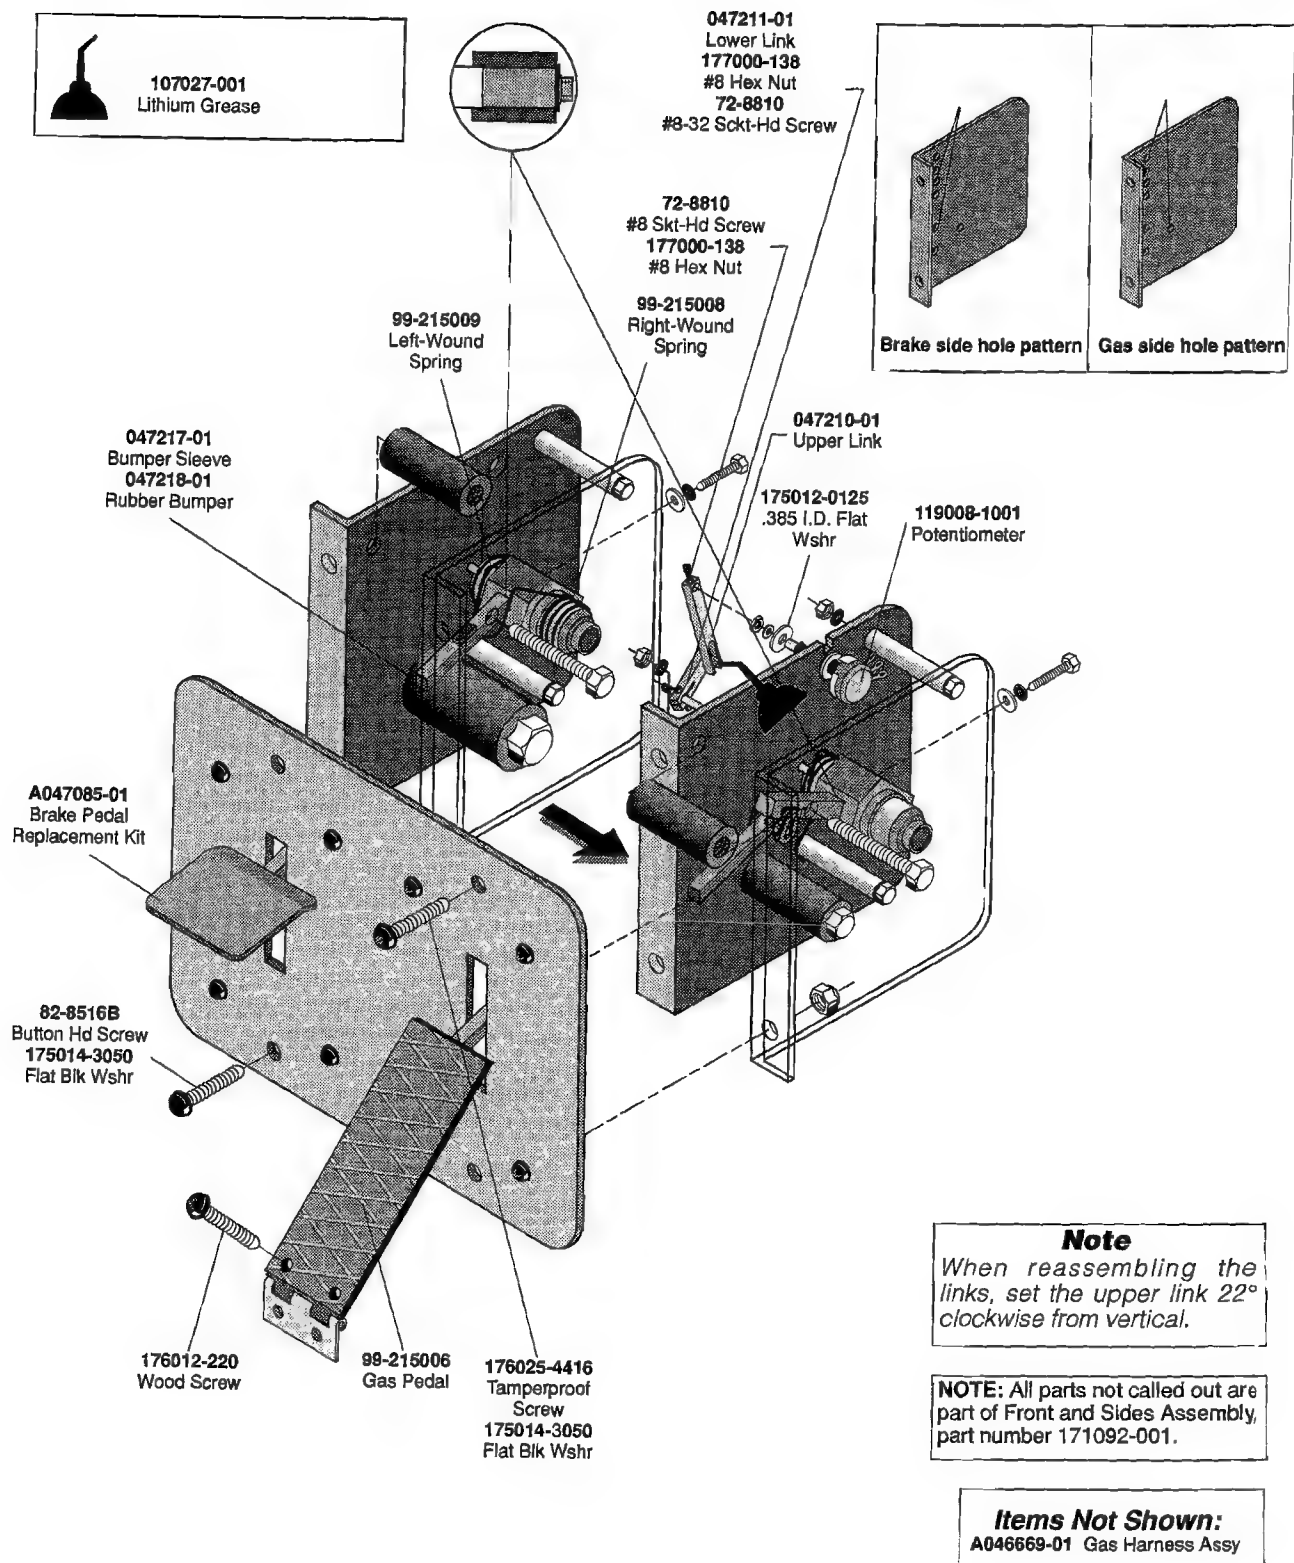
Maintaining the Brake and Gas Pedal Assembly
